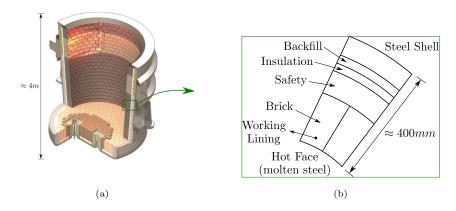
Example of a steel ladle. (a) Cutaway view showing the refractory linings. (b) Schematic representation of a line ring, top view.
